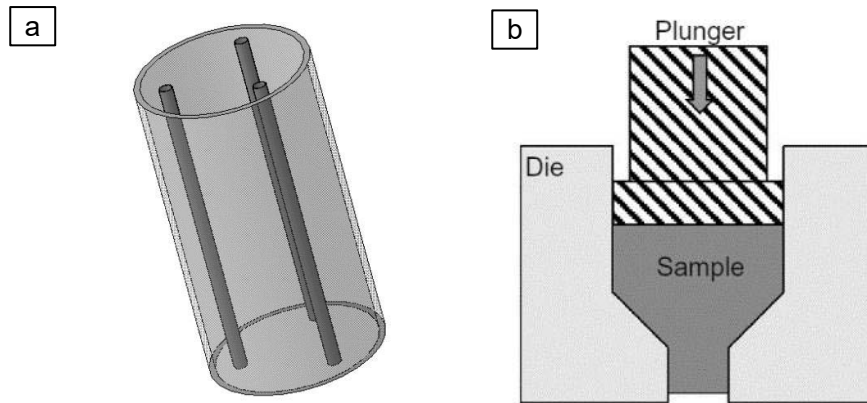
Scheme of hybrid samples preparation: assembling of matrix and wires (a); direct extrusion (b).
